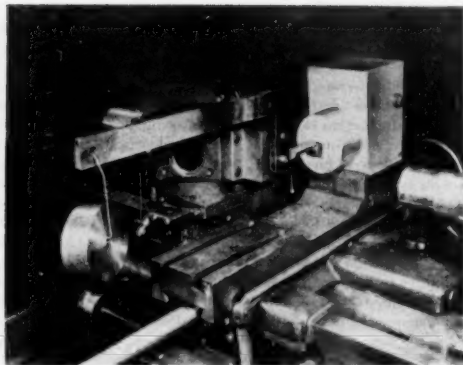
CALIBRATION OF RADIAL TOOL LOADS
